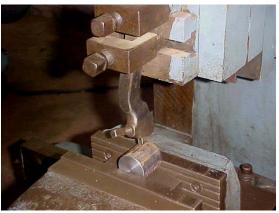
Mounting of job and tool in shaping machine.
